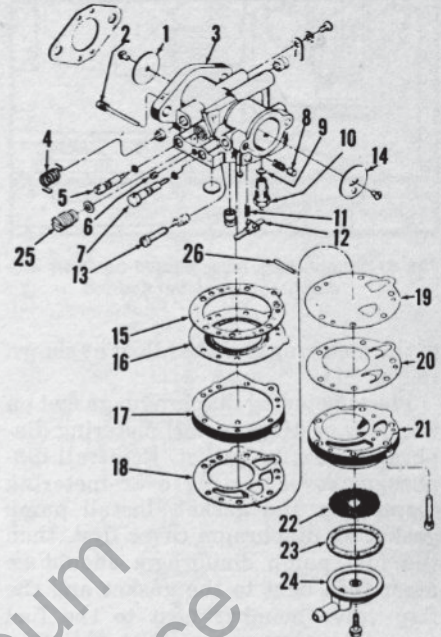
Exploded view of Tillotson model HL carburetor. On some HL carburetors, pump diaphragm (19) and valves (20) are one-piece. Governor valve (25) is not used on all carburetors.
